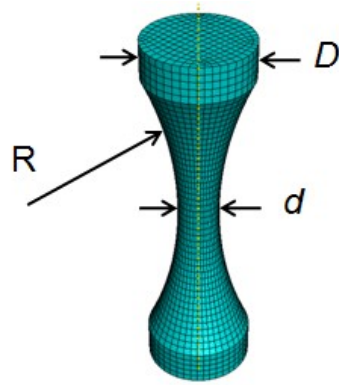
Model of specimen geometry S1 (Hourglass-shaped specimen) for uniaxial compression and tension tests ( $R = 50$  mm,  $D = 15$  mm,  $d = 6$  mm)
